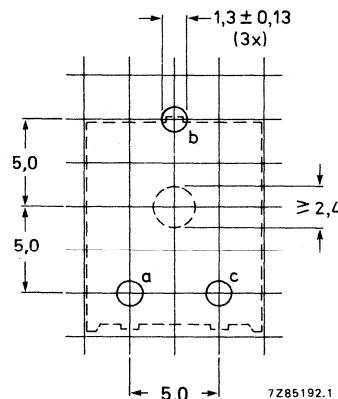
Hole pattern for horizontal versions, viewed from component side.
